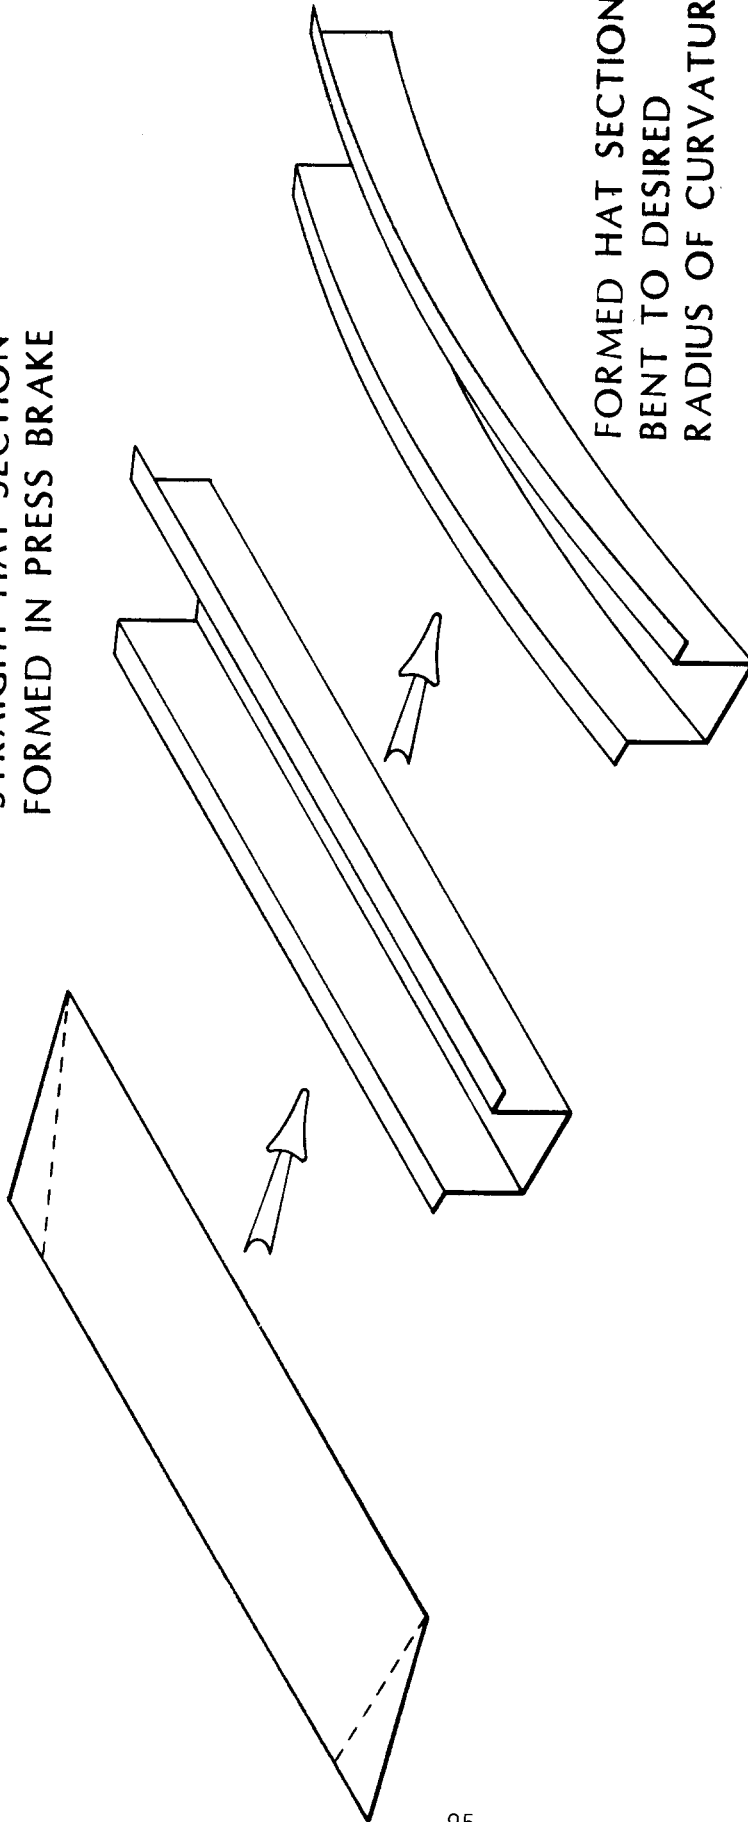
PROTOTYPE OPTICAL ASSEMBLY HAT SECTION PRODUCTION
